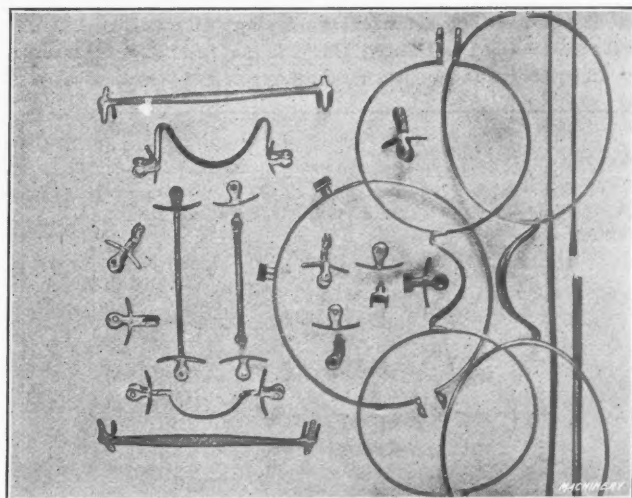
Examples of Eyeglass Parts joined by Electrical Soldering
